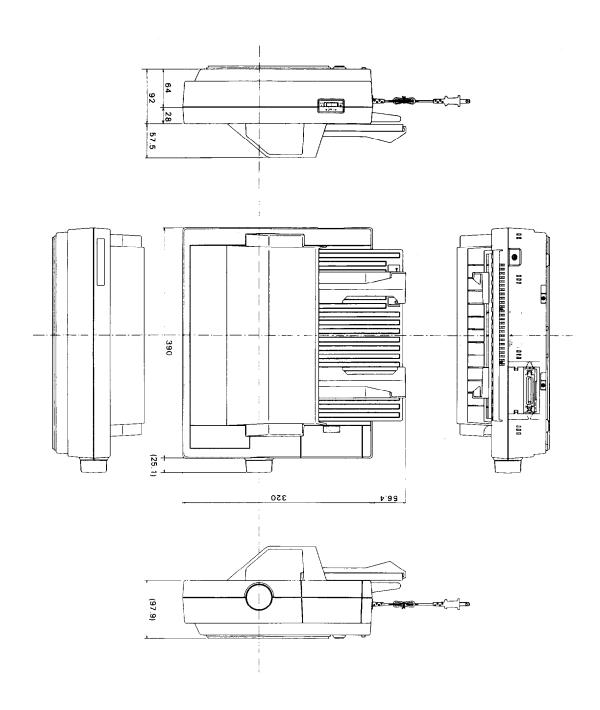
LQ-200/AP3000 Case Outline Drawing with Tractor Unit
